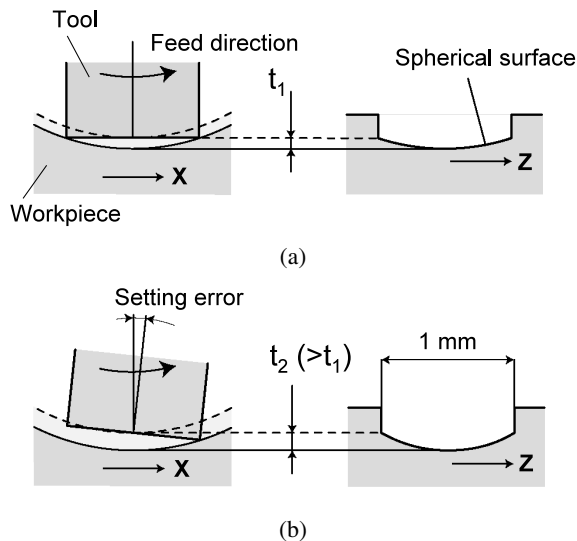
Schematic of the tool and workpiece during machining process. Tool is set (a) without tilting error and (b) with tilting error.
